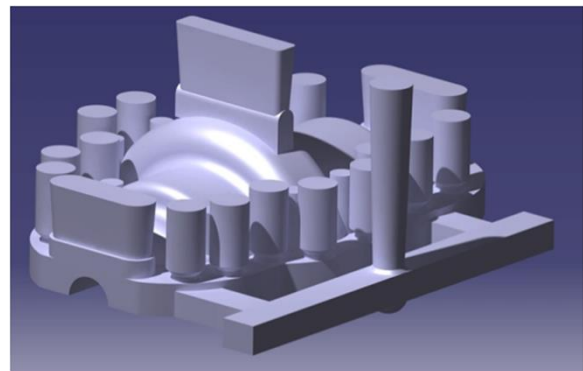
3D CAD modeling of improved gating system installed on pump casing
